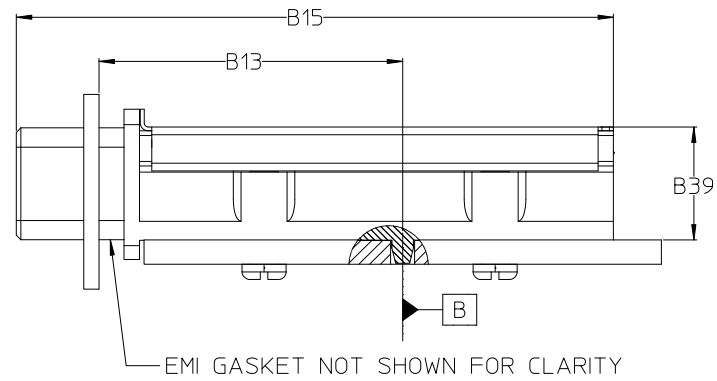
x8 Standard (0°) EMI Guide Housing Assembly Side View
